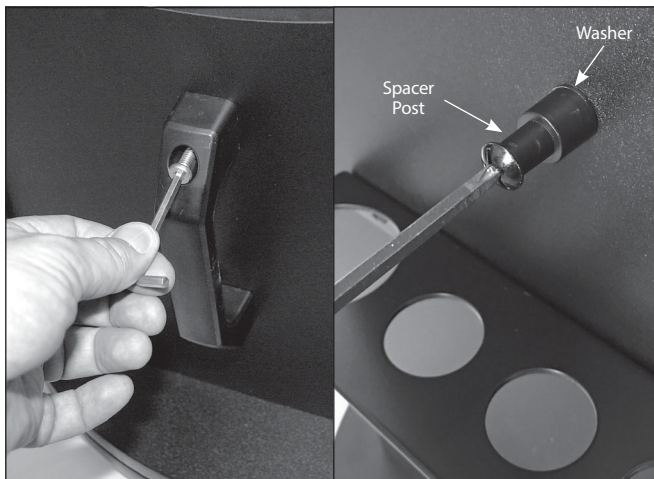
Use the Allen wrench and the two included handle mounting screws to attach the handle to the front panel
